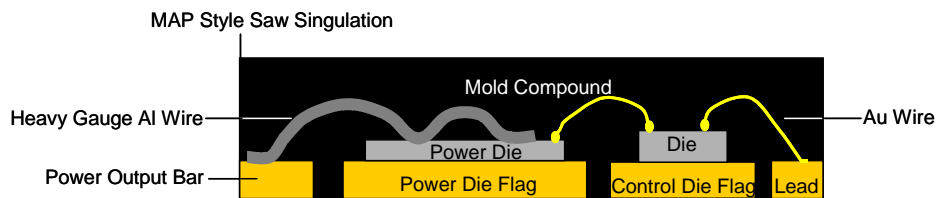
Cross-Section of a Custom PQFN MAP (Molded Array Package).
